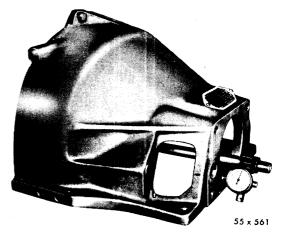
Typical Method of Checking Rear Face of Clutch Housing
